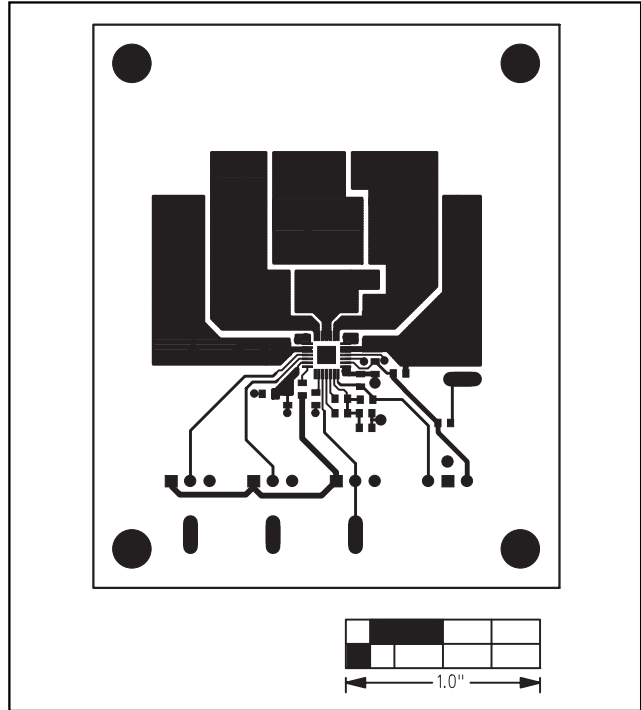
MAX1536 EV Kit PC Board Layout—Component Side
